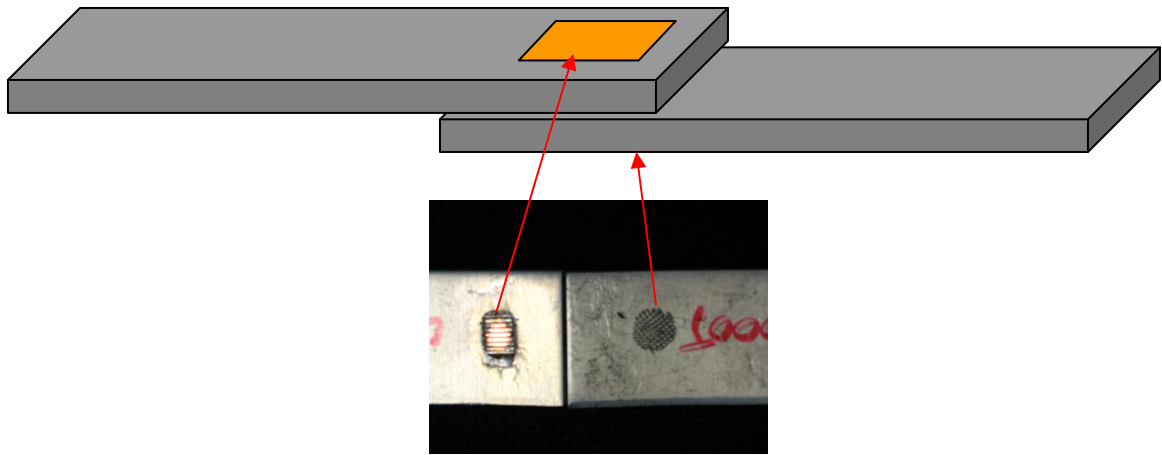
Buffer sheet placement on top and part marking at the bottom.
